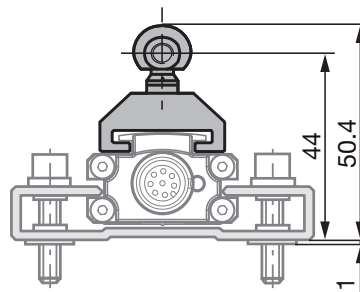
Dimensions and distances with BTL5-F-2814-1S magnet
